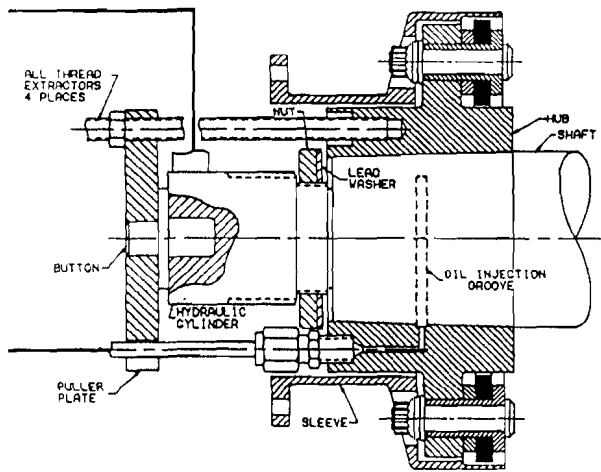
Hydraulic (Oil) Removal Methods for Keyed Hubs. Note: The hydraulic ram can be replaced with a steering-wheel-type mechanical puller.
